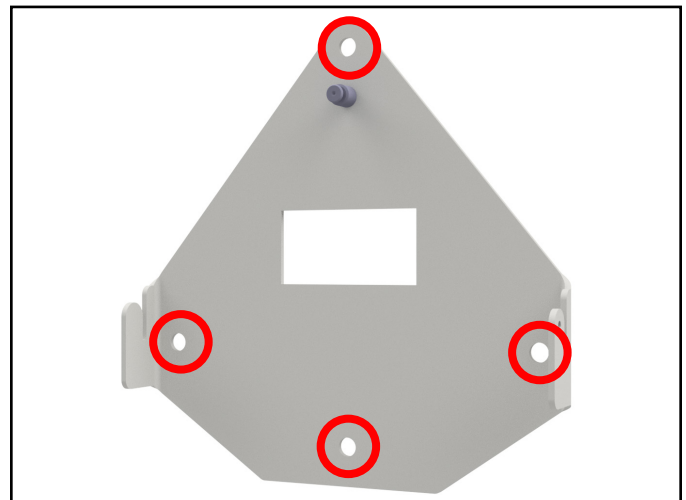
Mounting holes on the SmartLog Pro® SE mounting bracket
